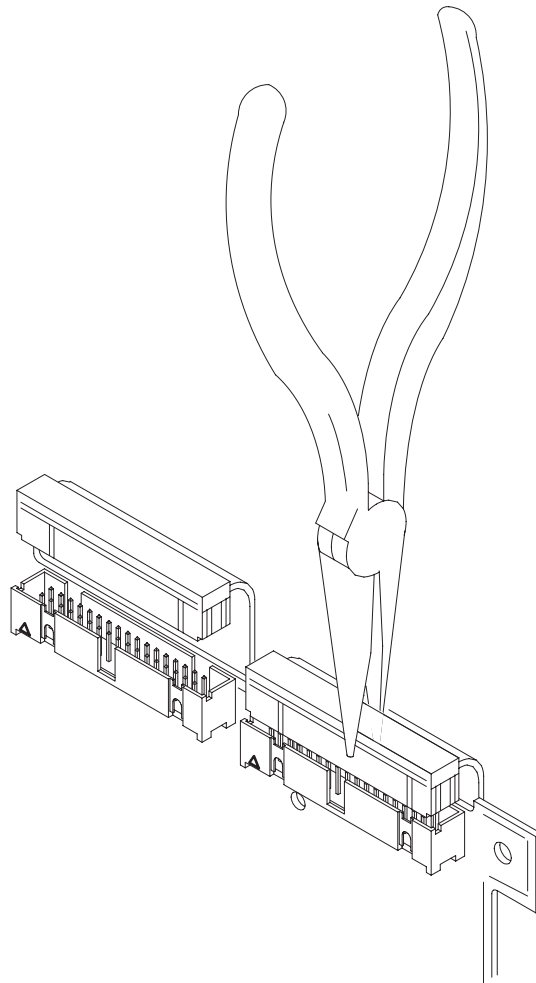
Pulling the Plugs from the Component Board Jacks
